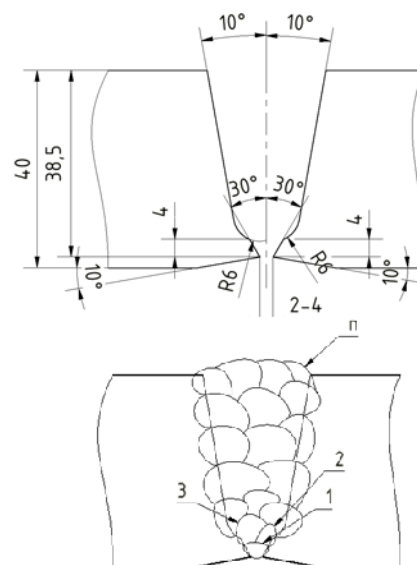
Layout of the groove and filling plan of the welded pipe and manifold joints: material 12H1MF.
